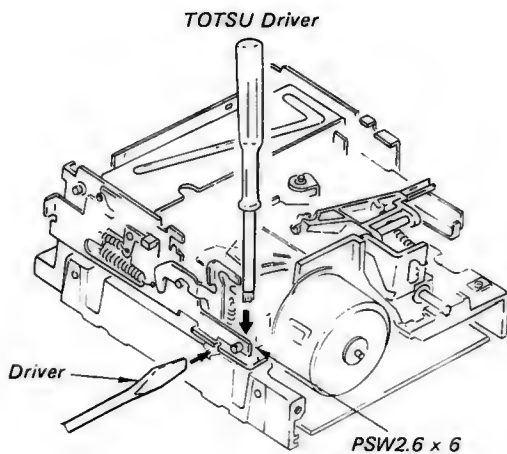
(b) TRK 00 Sensor Adjustment
